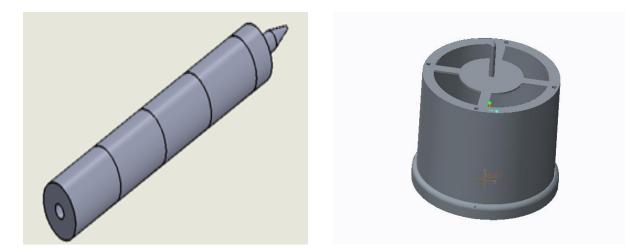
Isometric view of flow pipe and body of the motor cover
